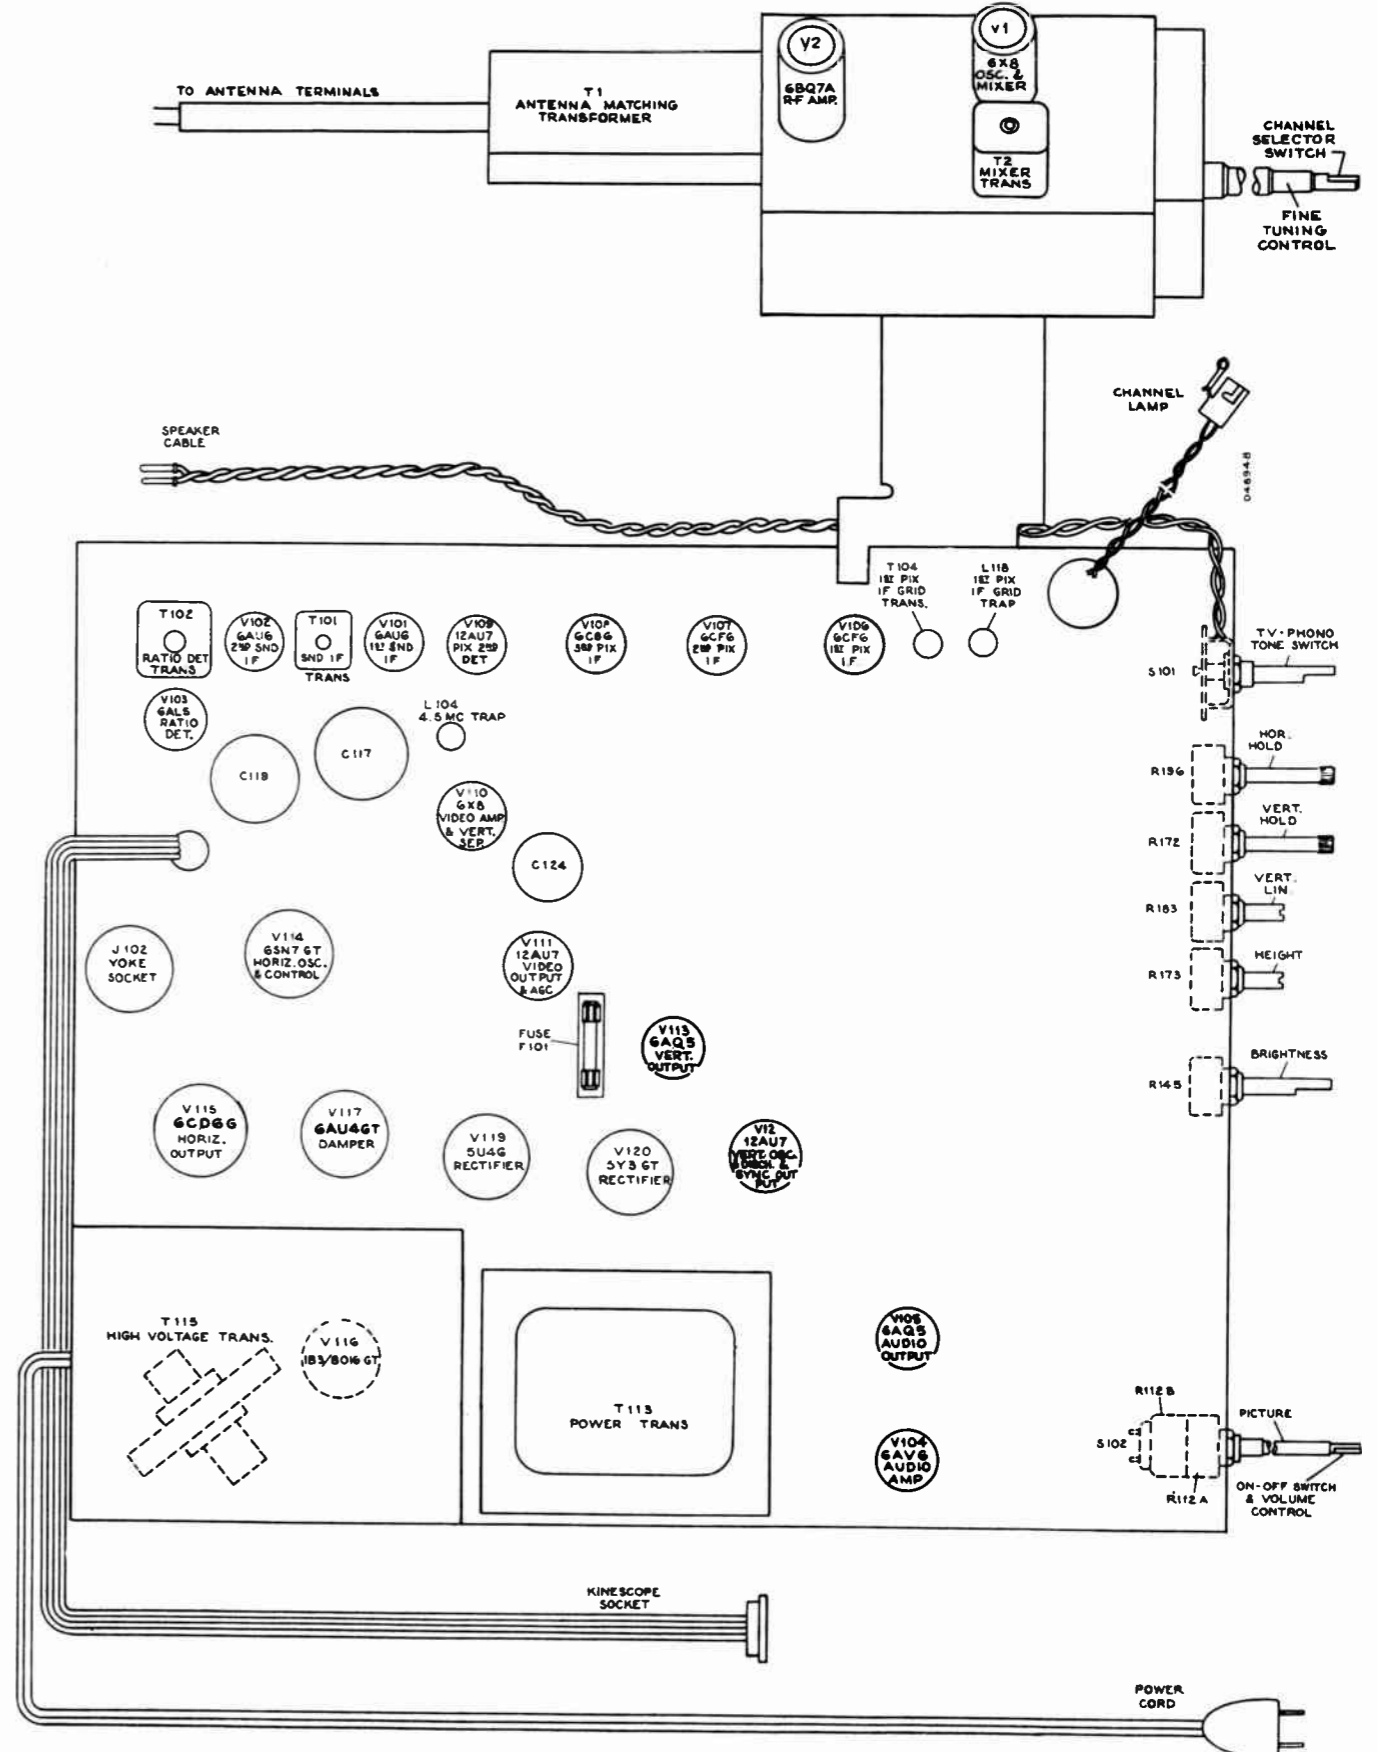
Chassis Top View (shown with KRK22C Tuner)
